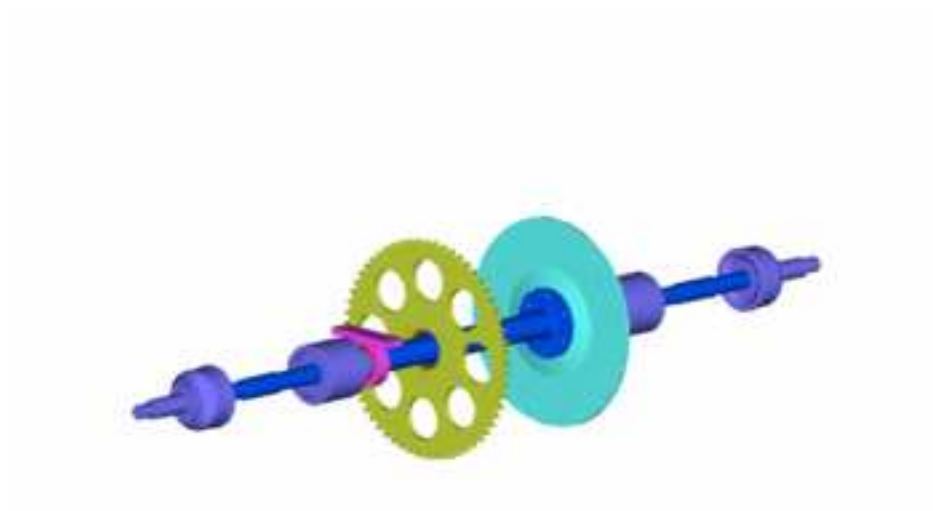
Assembly from lower CV joints to the centre shaft assembly.
